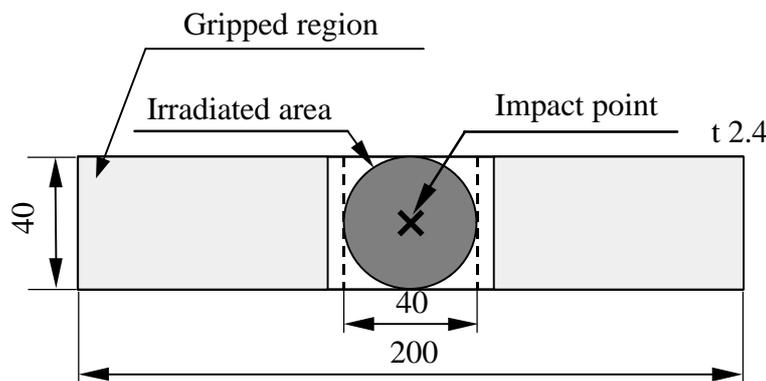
Shape and dimensions of impact specimen. All dimensions are in mm.
